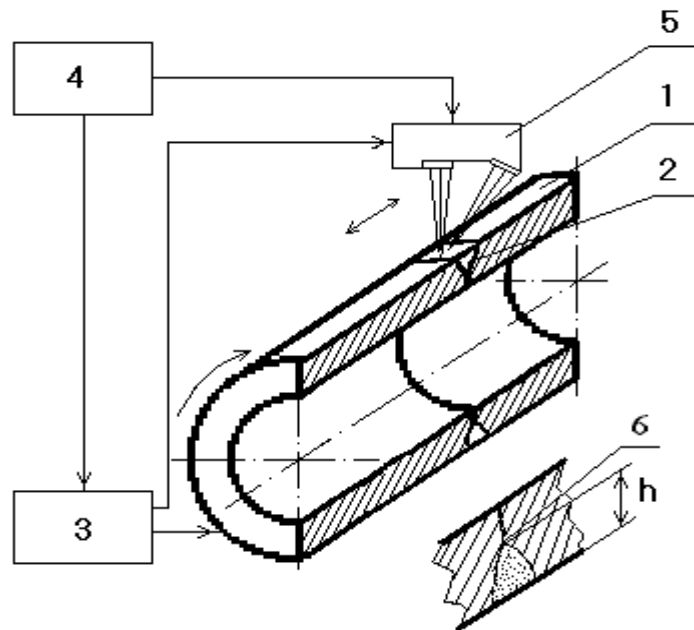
The example of the two-channel testing. 1 – tube with weld; 2 – weld; 3 – scanner; 4 – ultrasonic introscope; 5 – unit of PEP1 and PEP2; 6 – top of a incomplete penetration; h – depth of weld.
